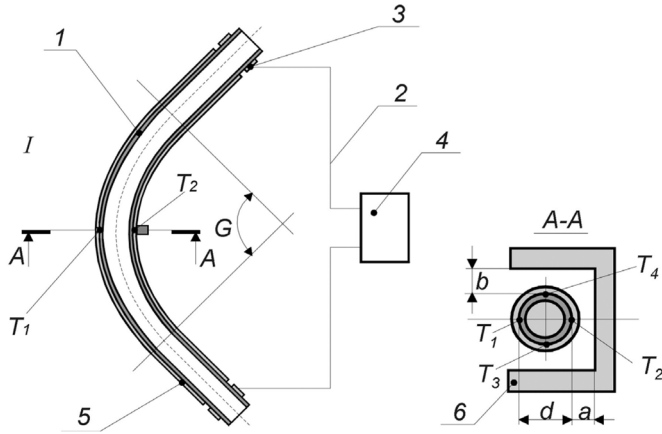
Experimental assembly diagram: 1-heated workpiece; 2-current supply; 3-water-cooled terminals; 4-constant current source; 5-thermal insulation; 6-magnetic core.
